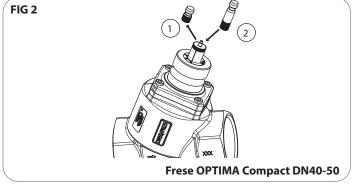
Before mounting the actuator on Frese OPTIMA Compact DN40-DN50 threaded versions
